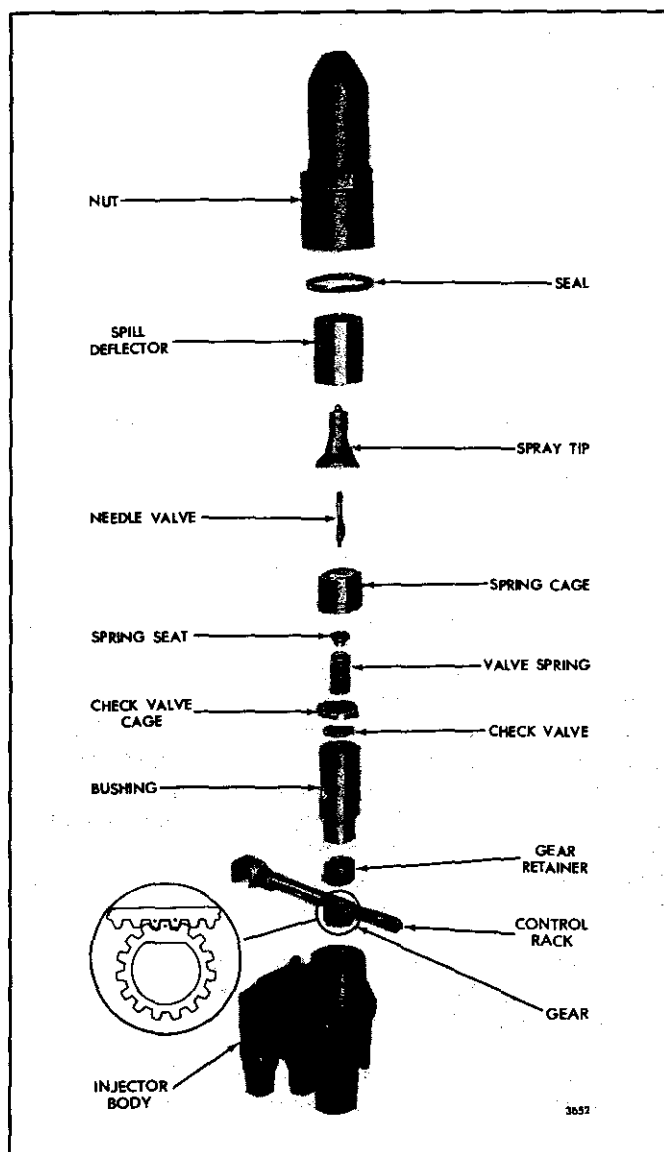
Injector Rack, Gear, Spray Tip and Valve Assembly Details and Relative Location of Parts
